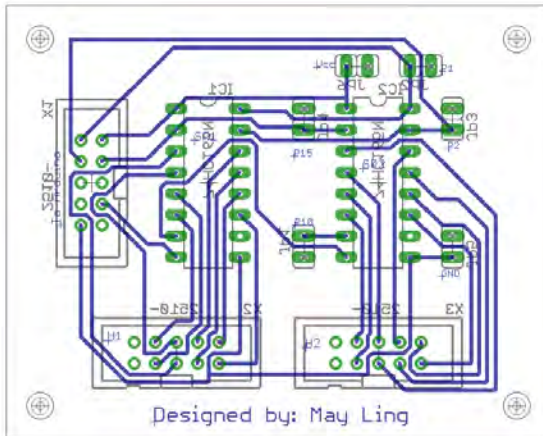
PCB Layout of First Two Shift Registers – SR1 & SR2
